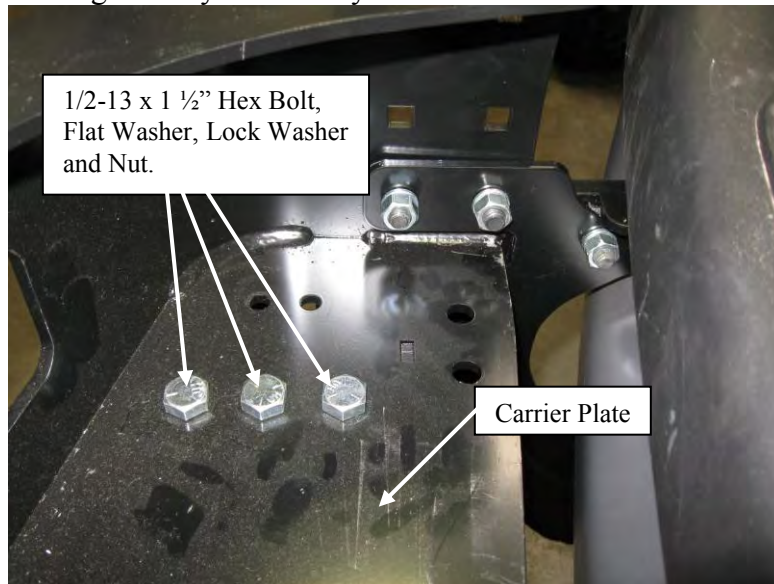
Large Frame Carrier: Carrier Plate Hex Bolt Positions.
